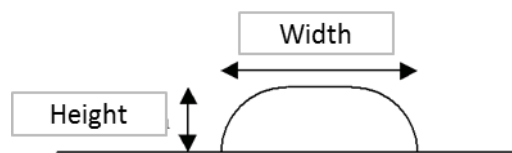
Definition of weld height, width and overall shape
